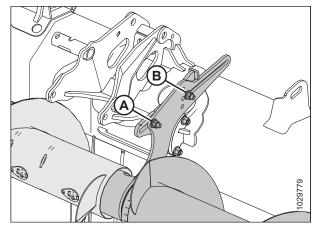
Initial Position of Adjustable Mounts – Three-Piece Auger
